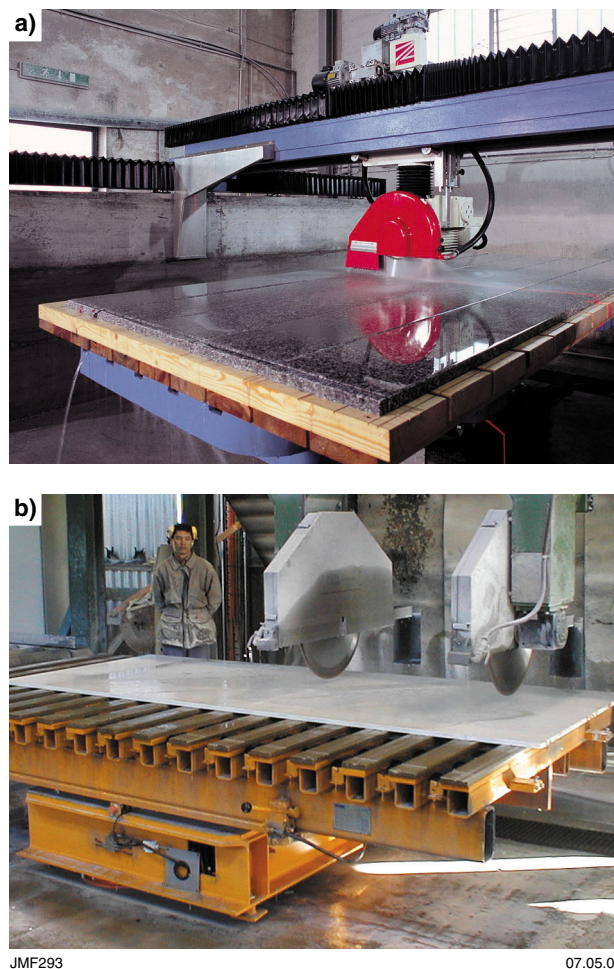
Bridge saws in operation: a) automated bridge saw cutting granite panels; b) a multi-bladed bridge saw operating in an automated sawing plant (photo (a) courtesy Castle Tools Tyrolit, photo (b) courtesy Melocco Stone)
